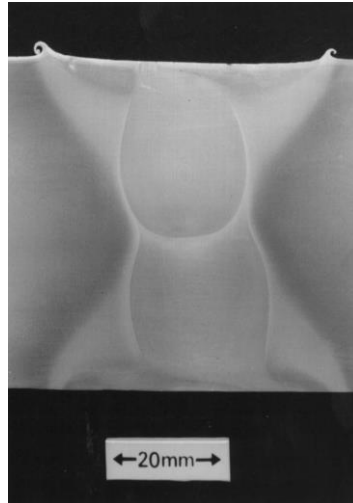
Aluminum extrusion 75 mm thick subjected to a double-sided friction stir welding process [51].
